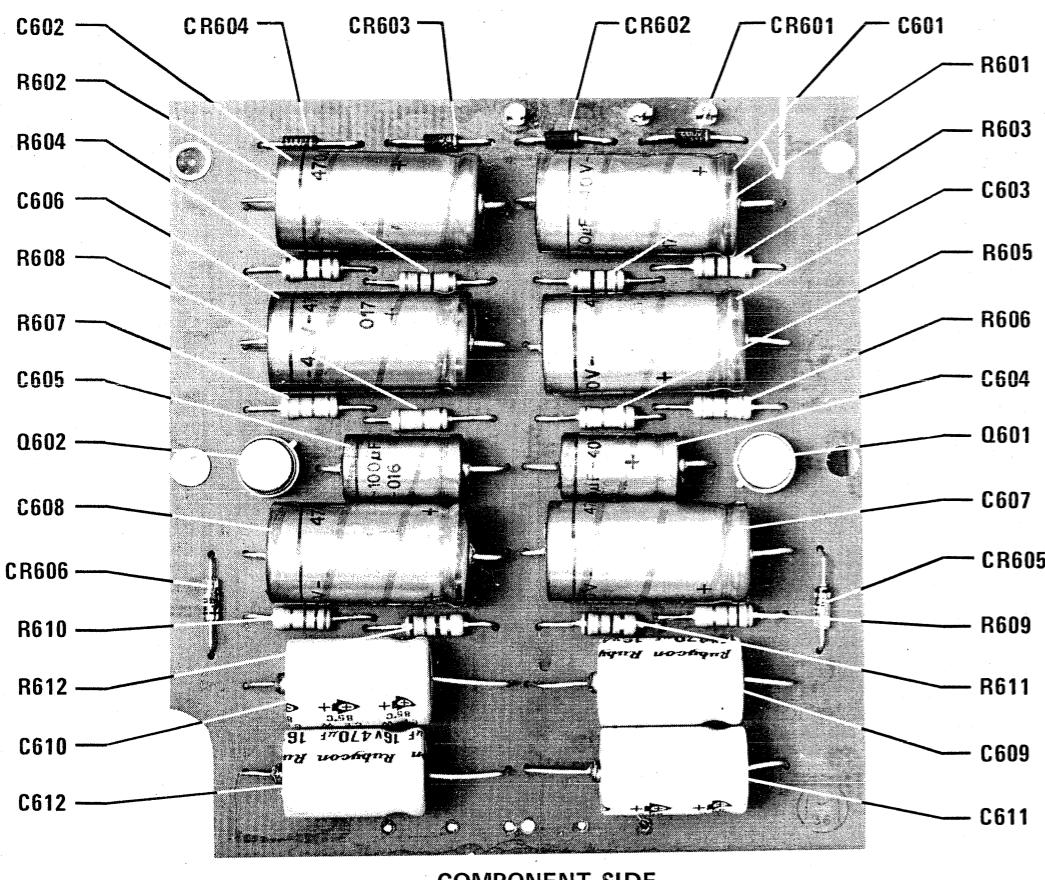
Power Supply Board – A7 Component Assembly Diagram
